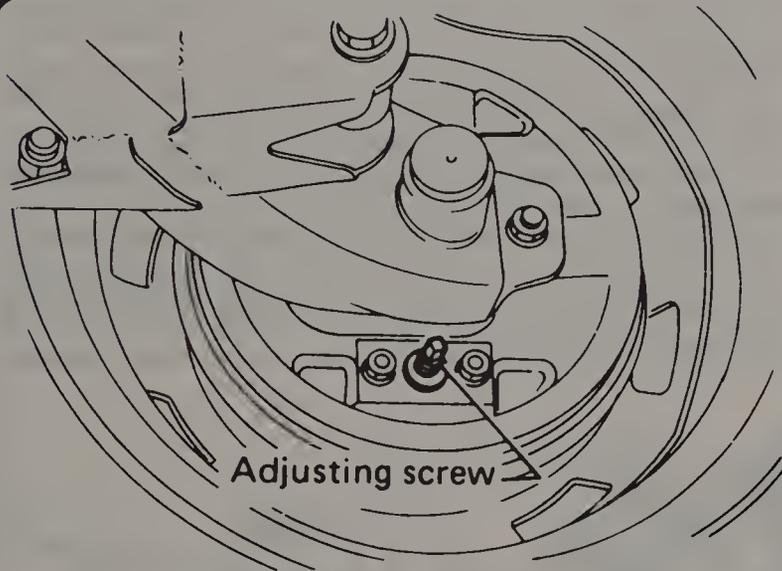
Shoe clearance adjusting screw (Sec 14)
